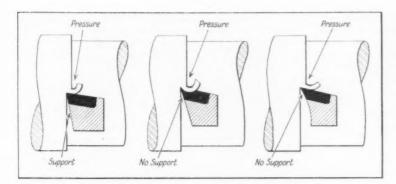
Unless the Carbide Tip is Adequately Supported, the Cutting Edge will Rapidly Deteriorate. (left) Tool with Adequately Supported Tip. (centre) Tool with Too Much Front Clearance. (right) Tool Ground on Periphery of Wheel
